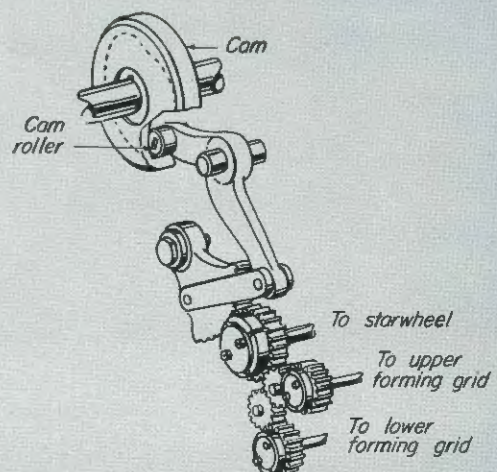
Right—Left-hand side of tying head, showing generation of starwheel and upper and lower forming grid motions
